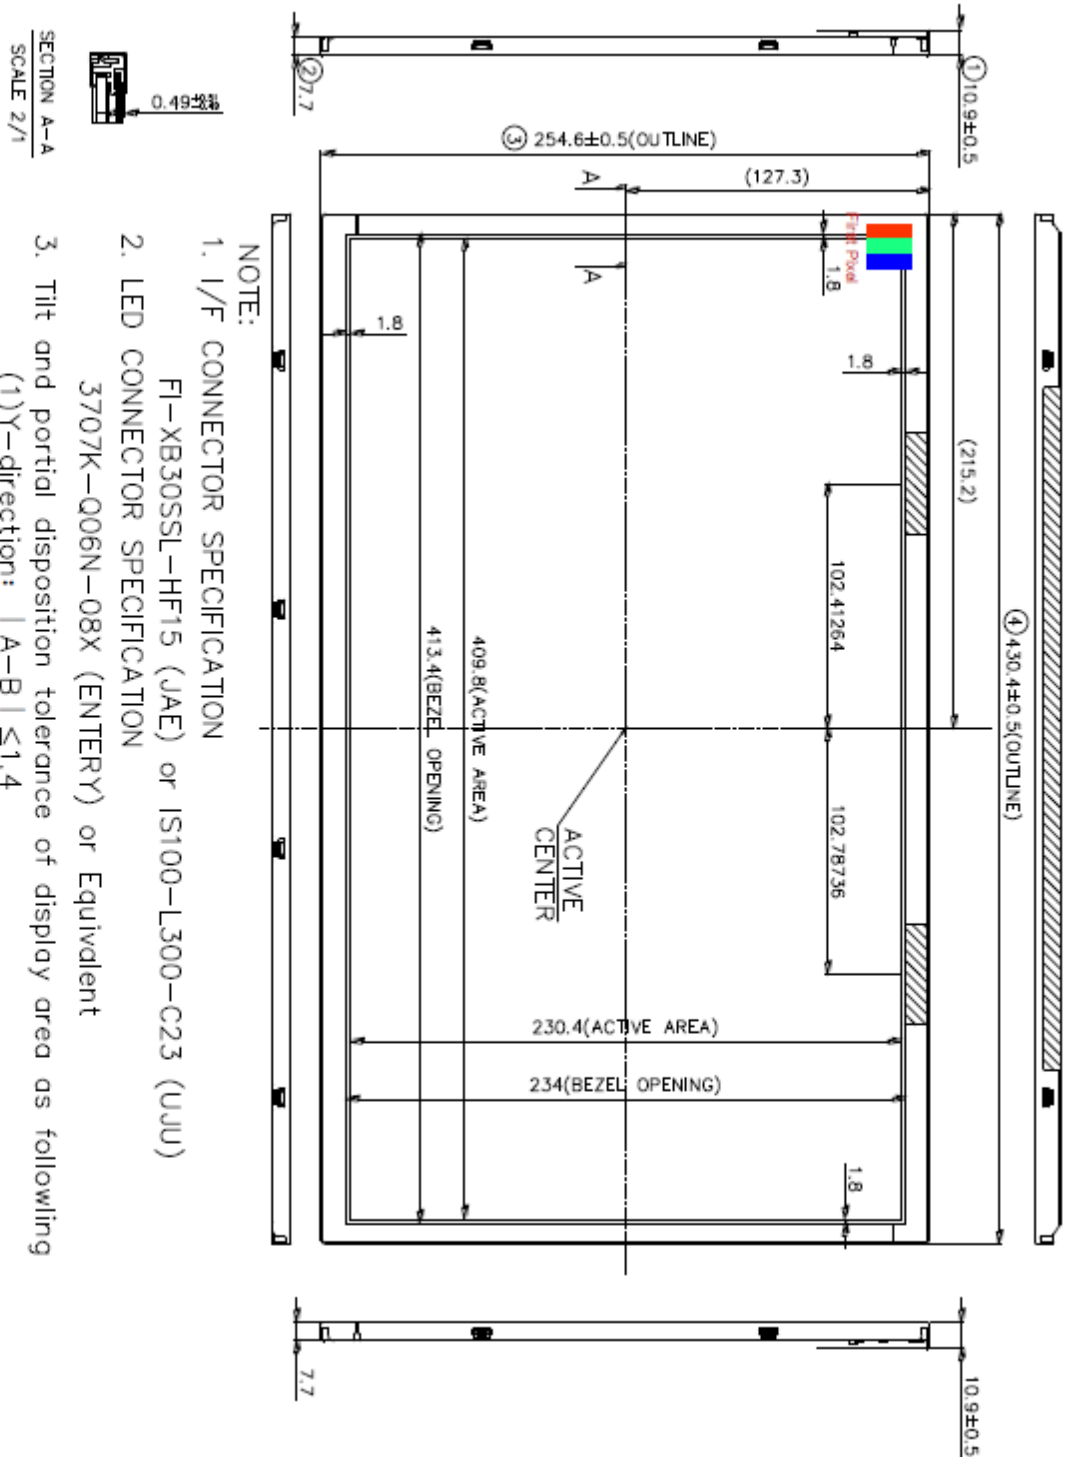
TFT-LCD Module Outline Dimensions (Rear view)
